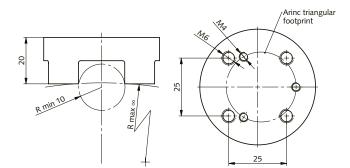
Mounting adapter for tubes, Ø25...∞ Type 8433AP20 (high temp. cement or spot welding attachement)
